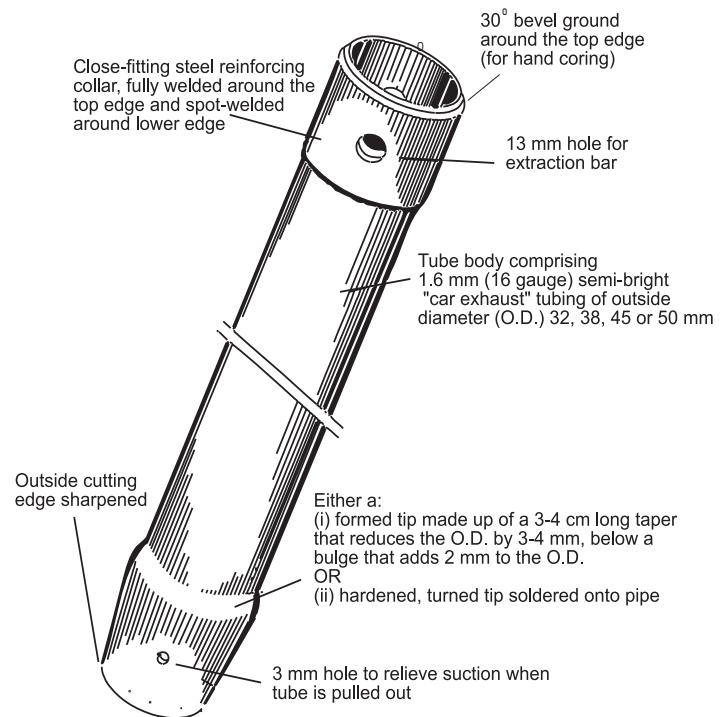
Features of a thin-walled soil coring tube suitable for coring to a depth of 1.8 m in most soil profiles free of stony obstructions. The cutting end shown is formed from the tube using a metal die (see below).
